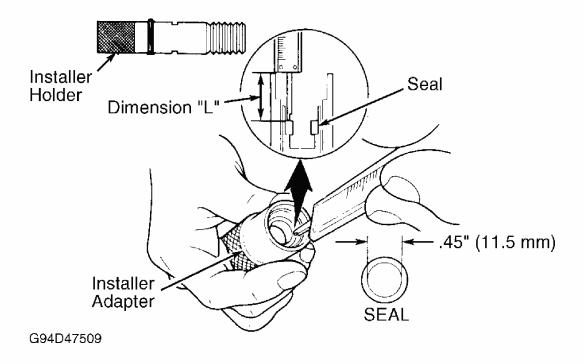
Installing Valve Guide Seals Courtesy of MAZDA MOTORS CORP.
